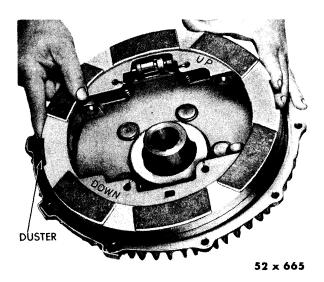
Removing or Installing Pressure Plate Assembly (Rear Disc Brake)
